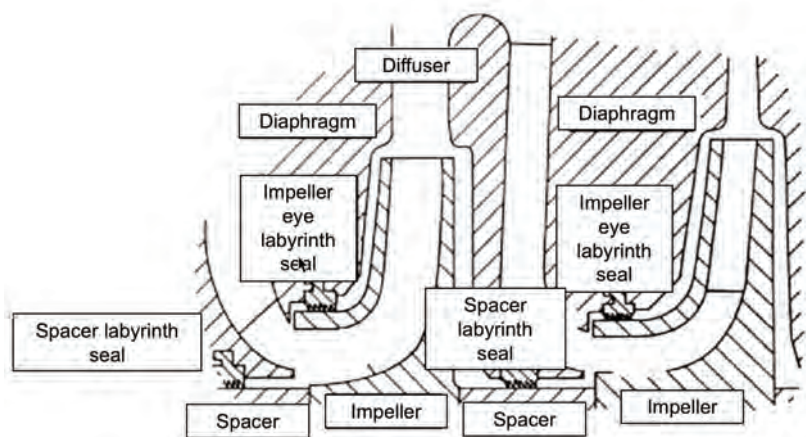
Internal seals in a centrifugal compressor (courtesy of Dresser-Rand).
